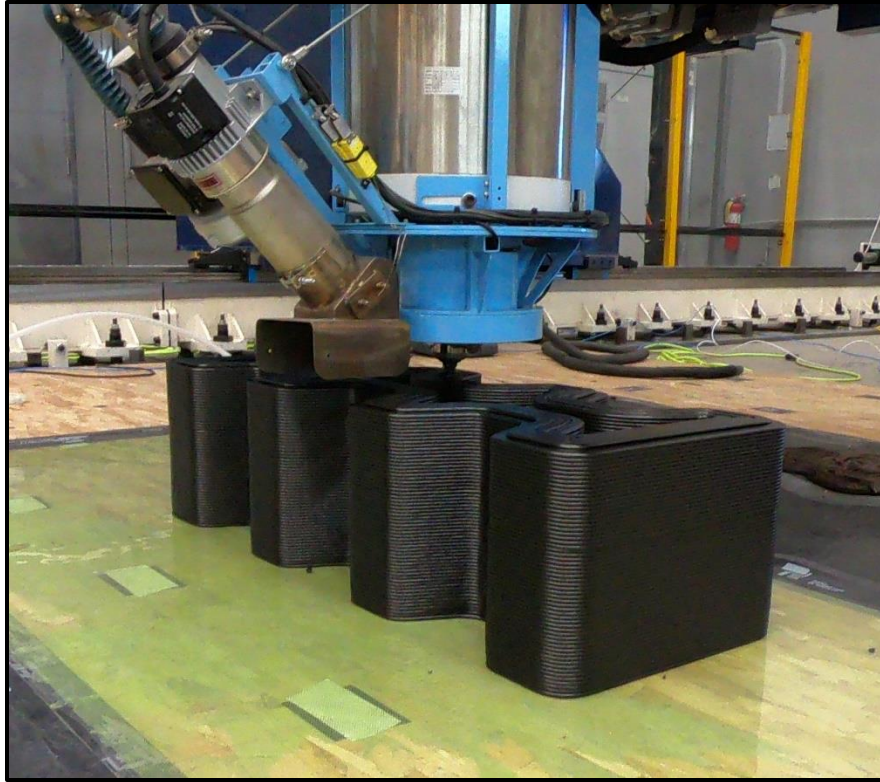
3D Printing of Multi-Corrugation Mold – Single Section
